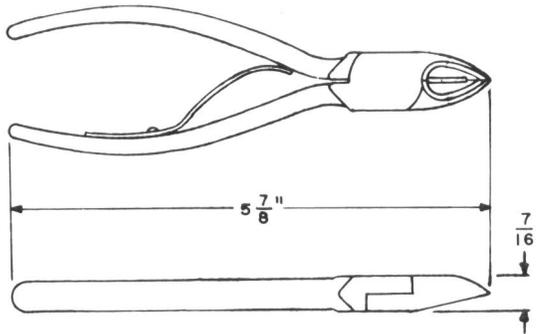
KS-16060 Cushion-Jaw Cutting Pliers
